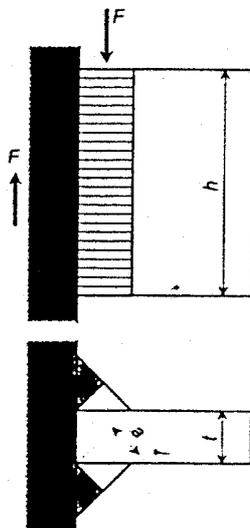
Double fillet welded joint loaded parallel to the weld axis
